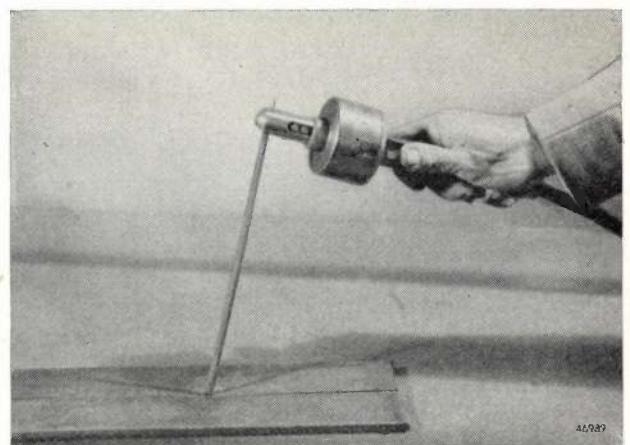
Photograph of electrode holder specially designed for contact arc-welding. Starting is by pressing the button under the thumb, which closes the circuit.
